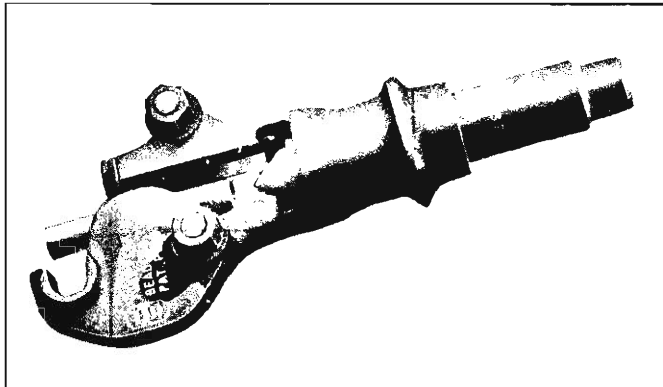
Hydraulic Brake Tube Double Flaring Tool
